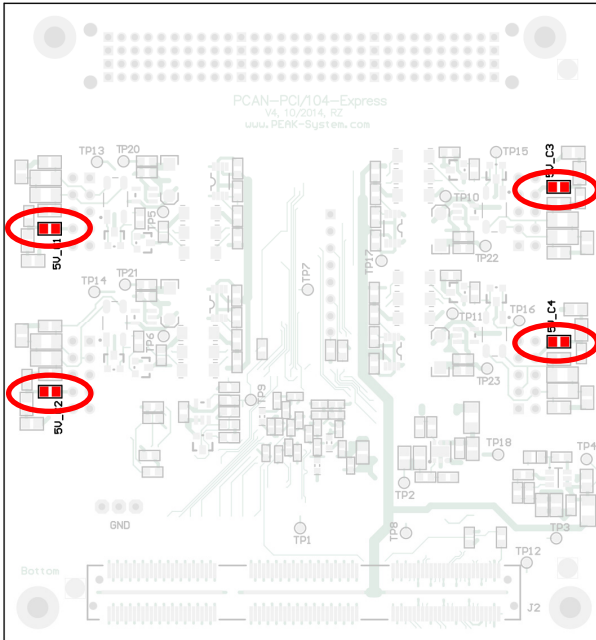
Positions of the soldering fields on the bottom of the PCAN-PCI/104-Express Quad card, upper position left CAN channel 1 and right CAN channel 3, lower position left CAN channel 2 and right CAN channel 4
